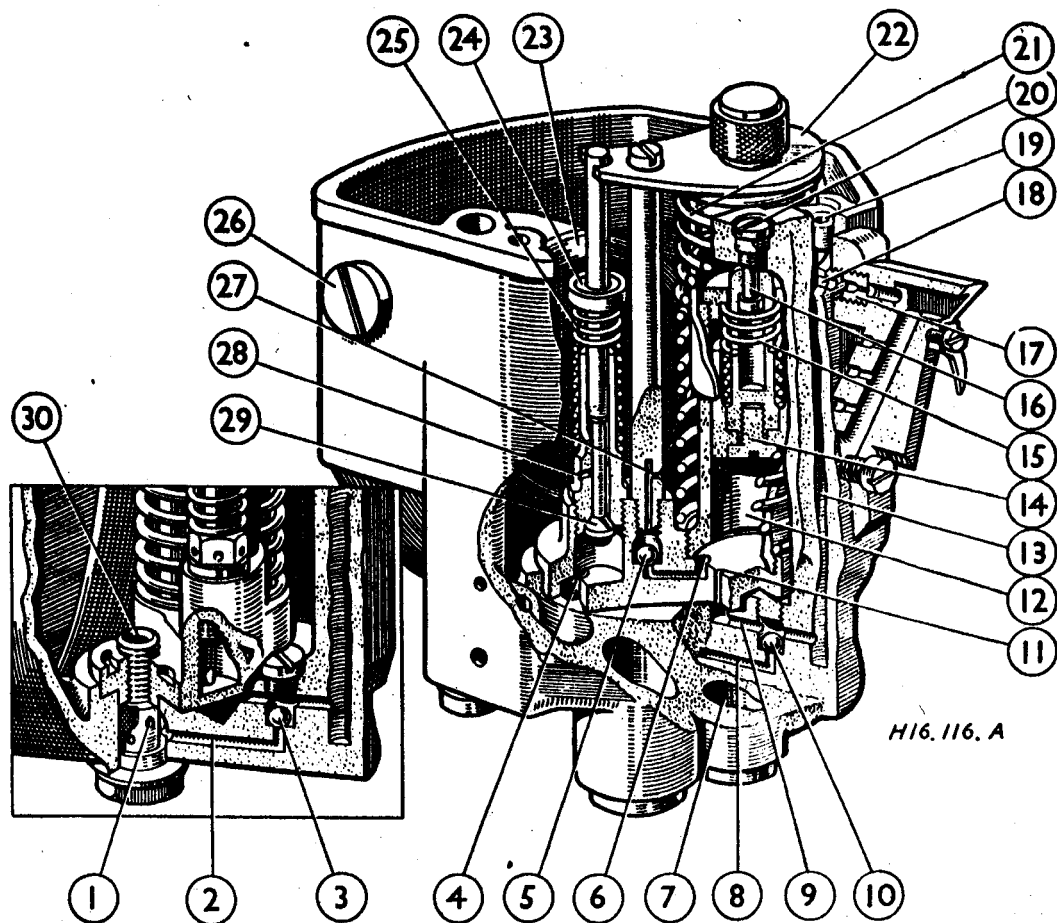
A sectional view of the carburettor bowl showing the pump and economy device.
